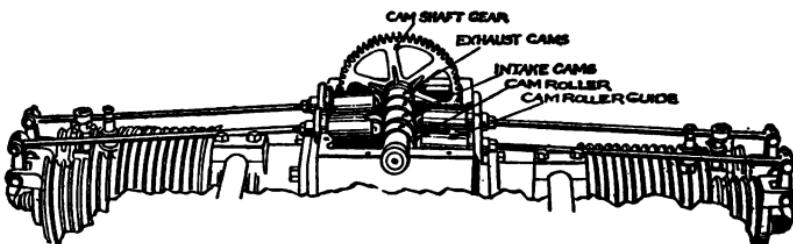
One method of arranging the cams-shaft and valve-operating gear on a double opposed cylinder engine.
